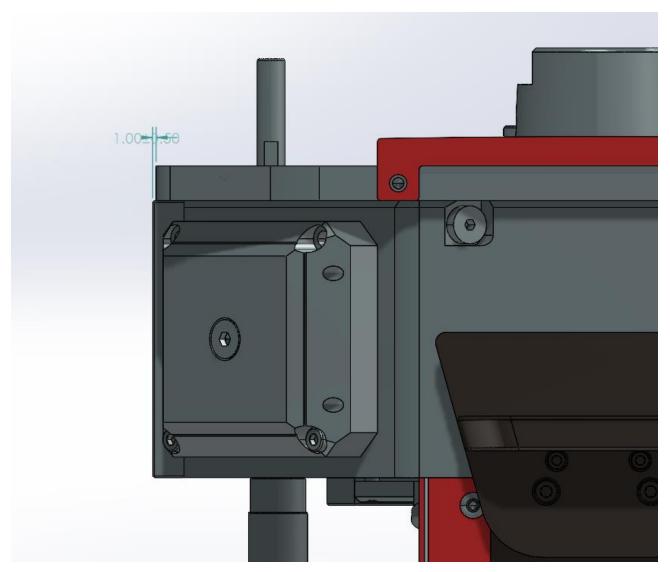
1mm discrepancy on laser head mating face (zoomed out)
